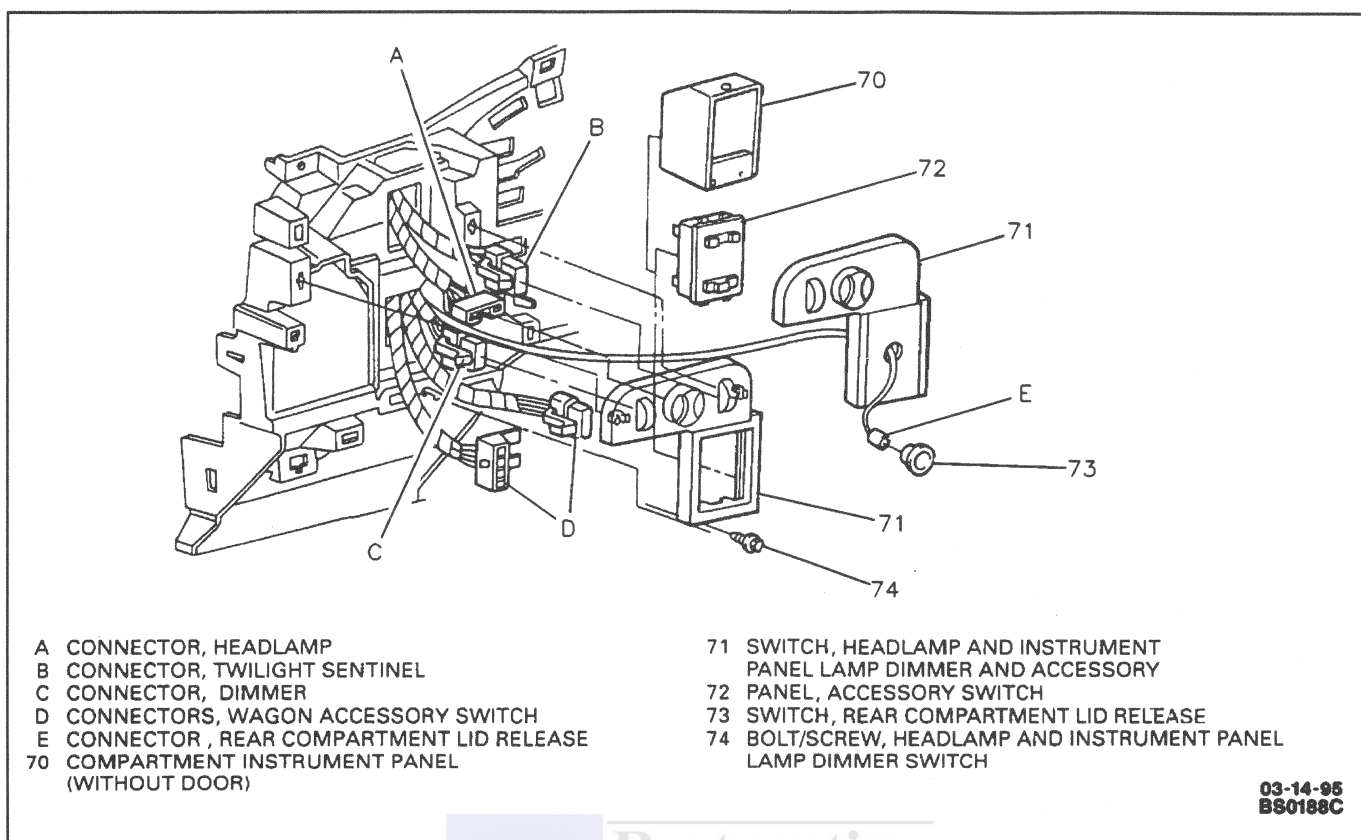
Headlamp, Instrument Panel Lamp and Accessory Switch Panel and Compartment - (Chevrolet)
